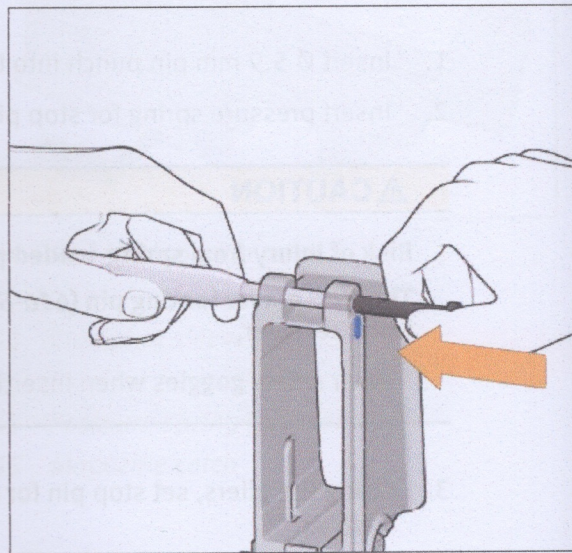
Pushing locking pin before the stop pin for locking pin
